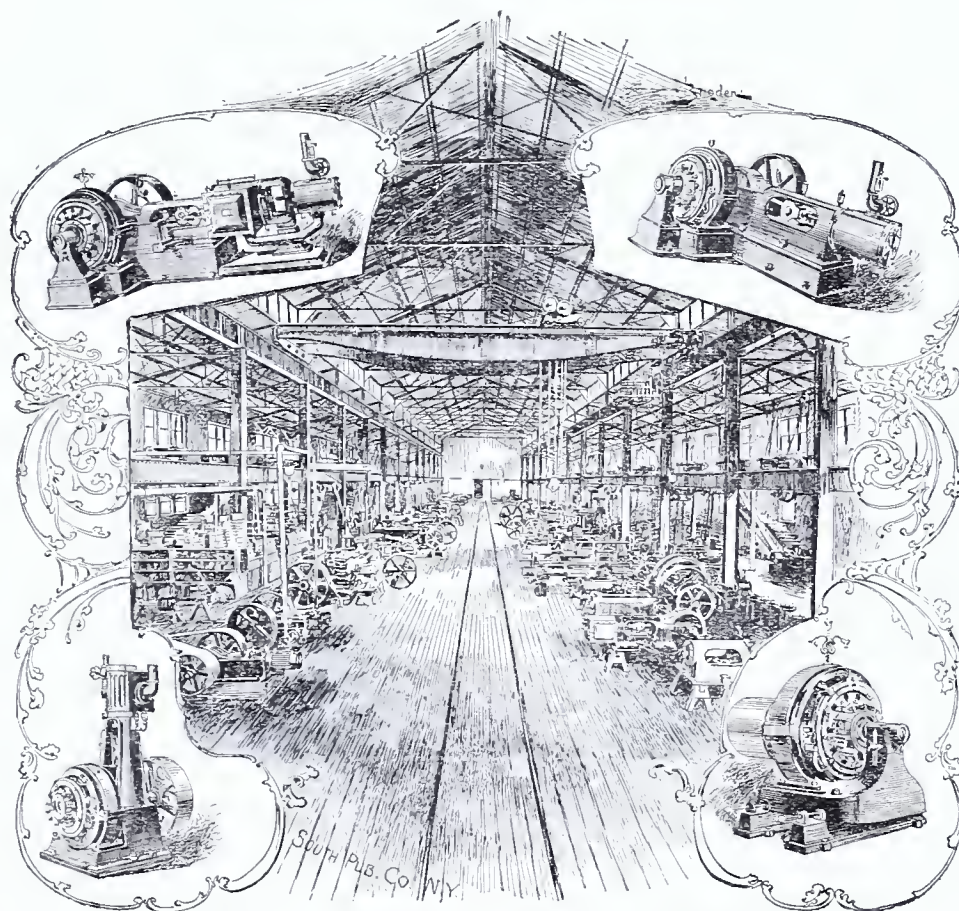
INTERIOR VIEW OF MACHINE SHOP, McEWEN MANUFACTURING CO.
